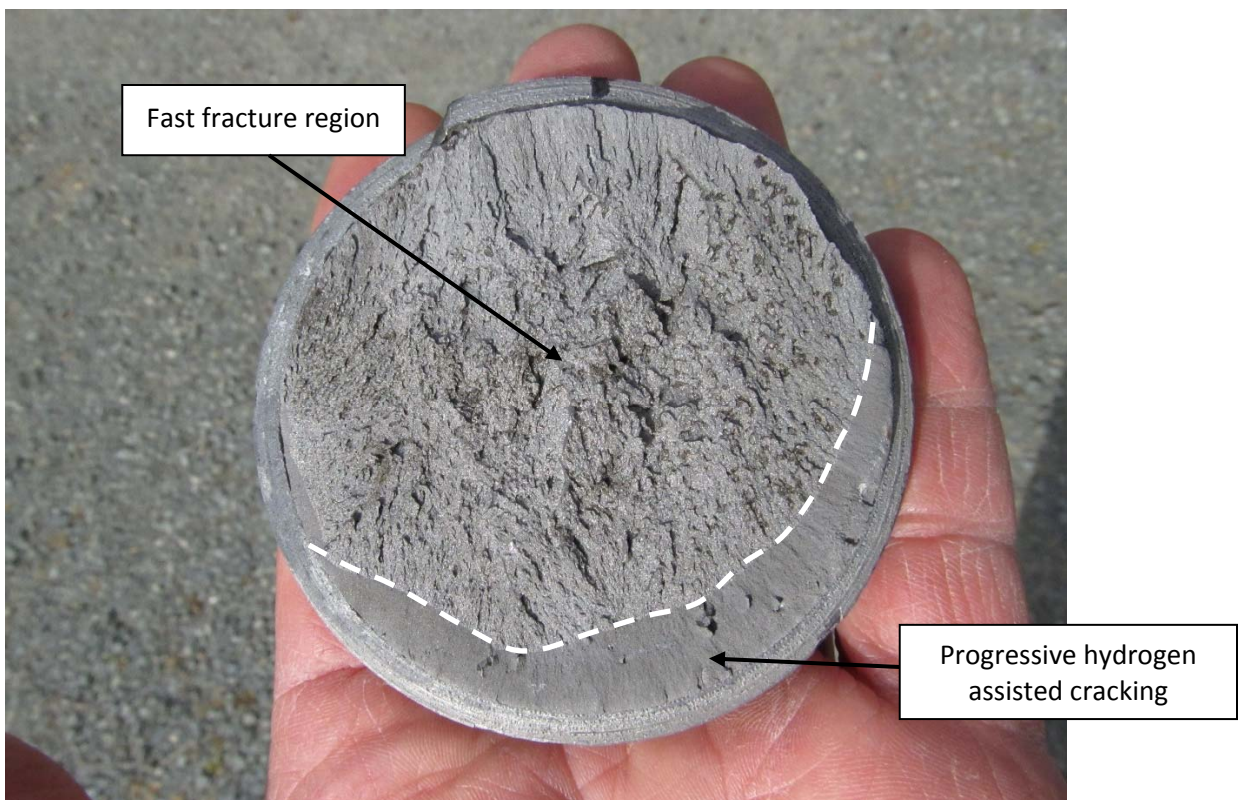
The fracture surface showing progressive hydrogen assisted cracking and fast fracture areas.
